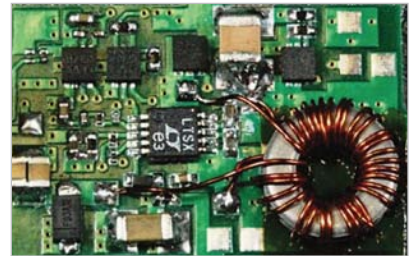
The complete power supply fits onto a 23x15x3.5-mm PCB.
